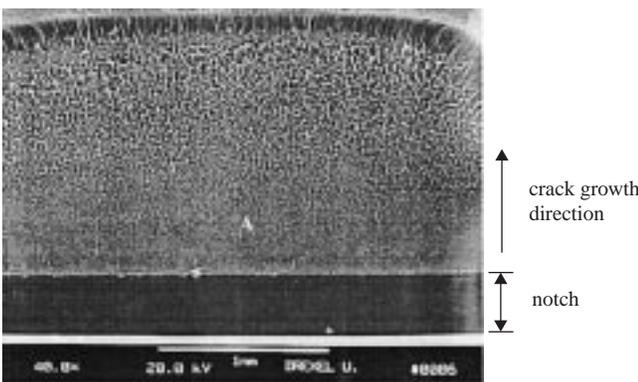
General view of the fracture surface of a specimen at 15% yield stress, illustrating brittle failure.
